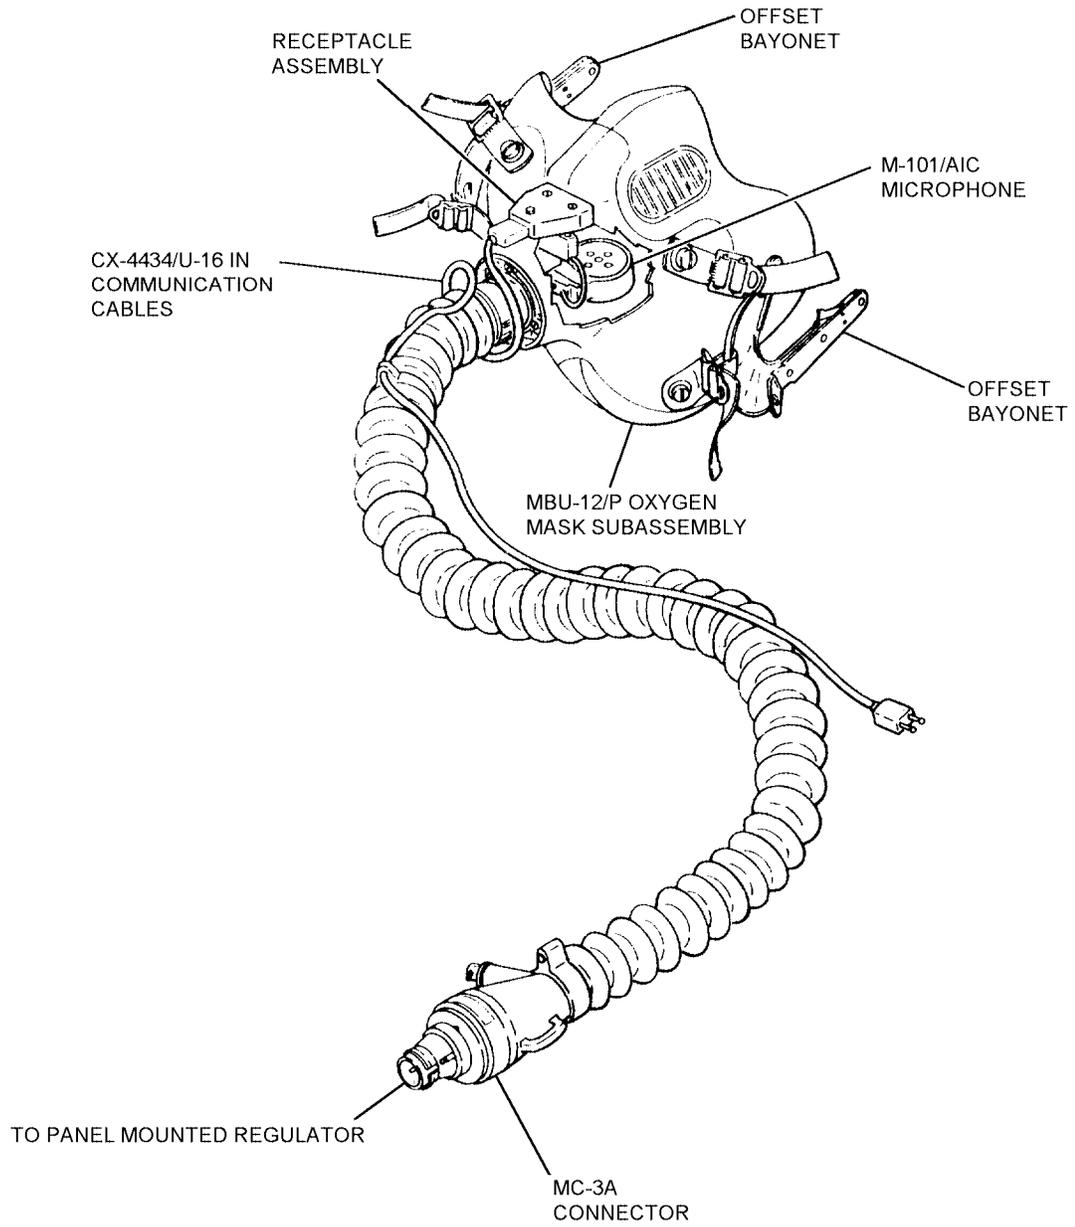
MBU-17(V)2/P Oxygen Mask Assembly
